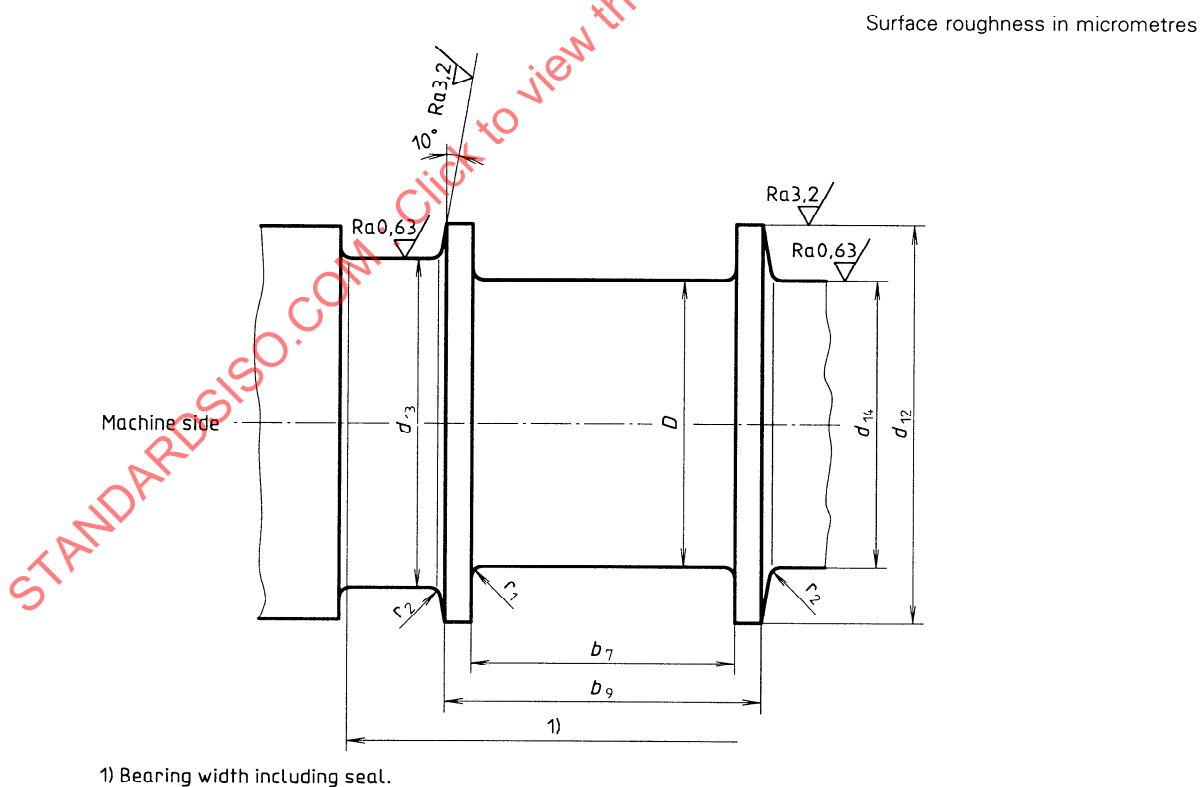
Shaft design for fixed bearing (thrust bearing parts A, B and K)
